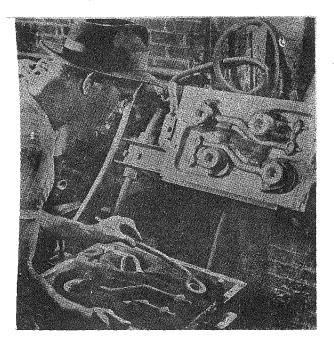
Setting cores in cavity of mold for making domestic gas-range burner castings. (Courtesy of Aluminum Co. of America.)
